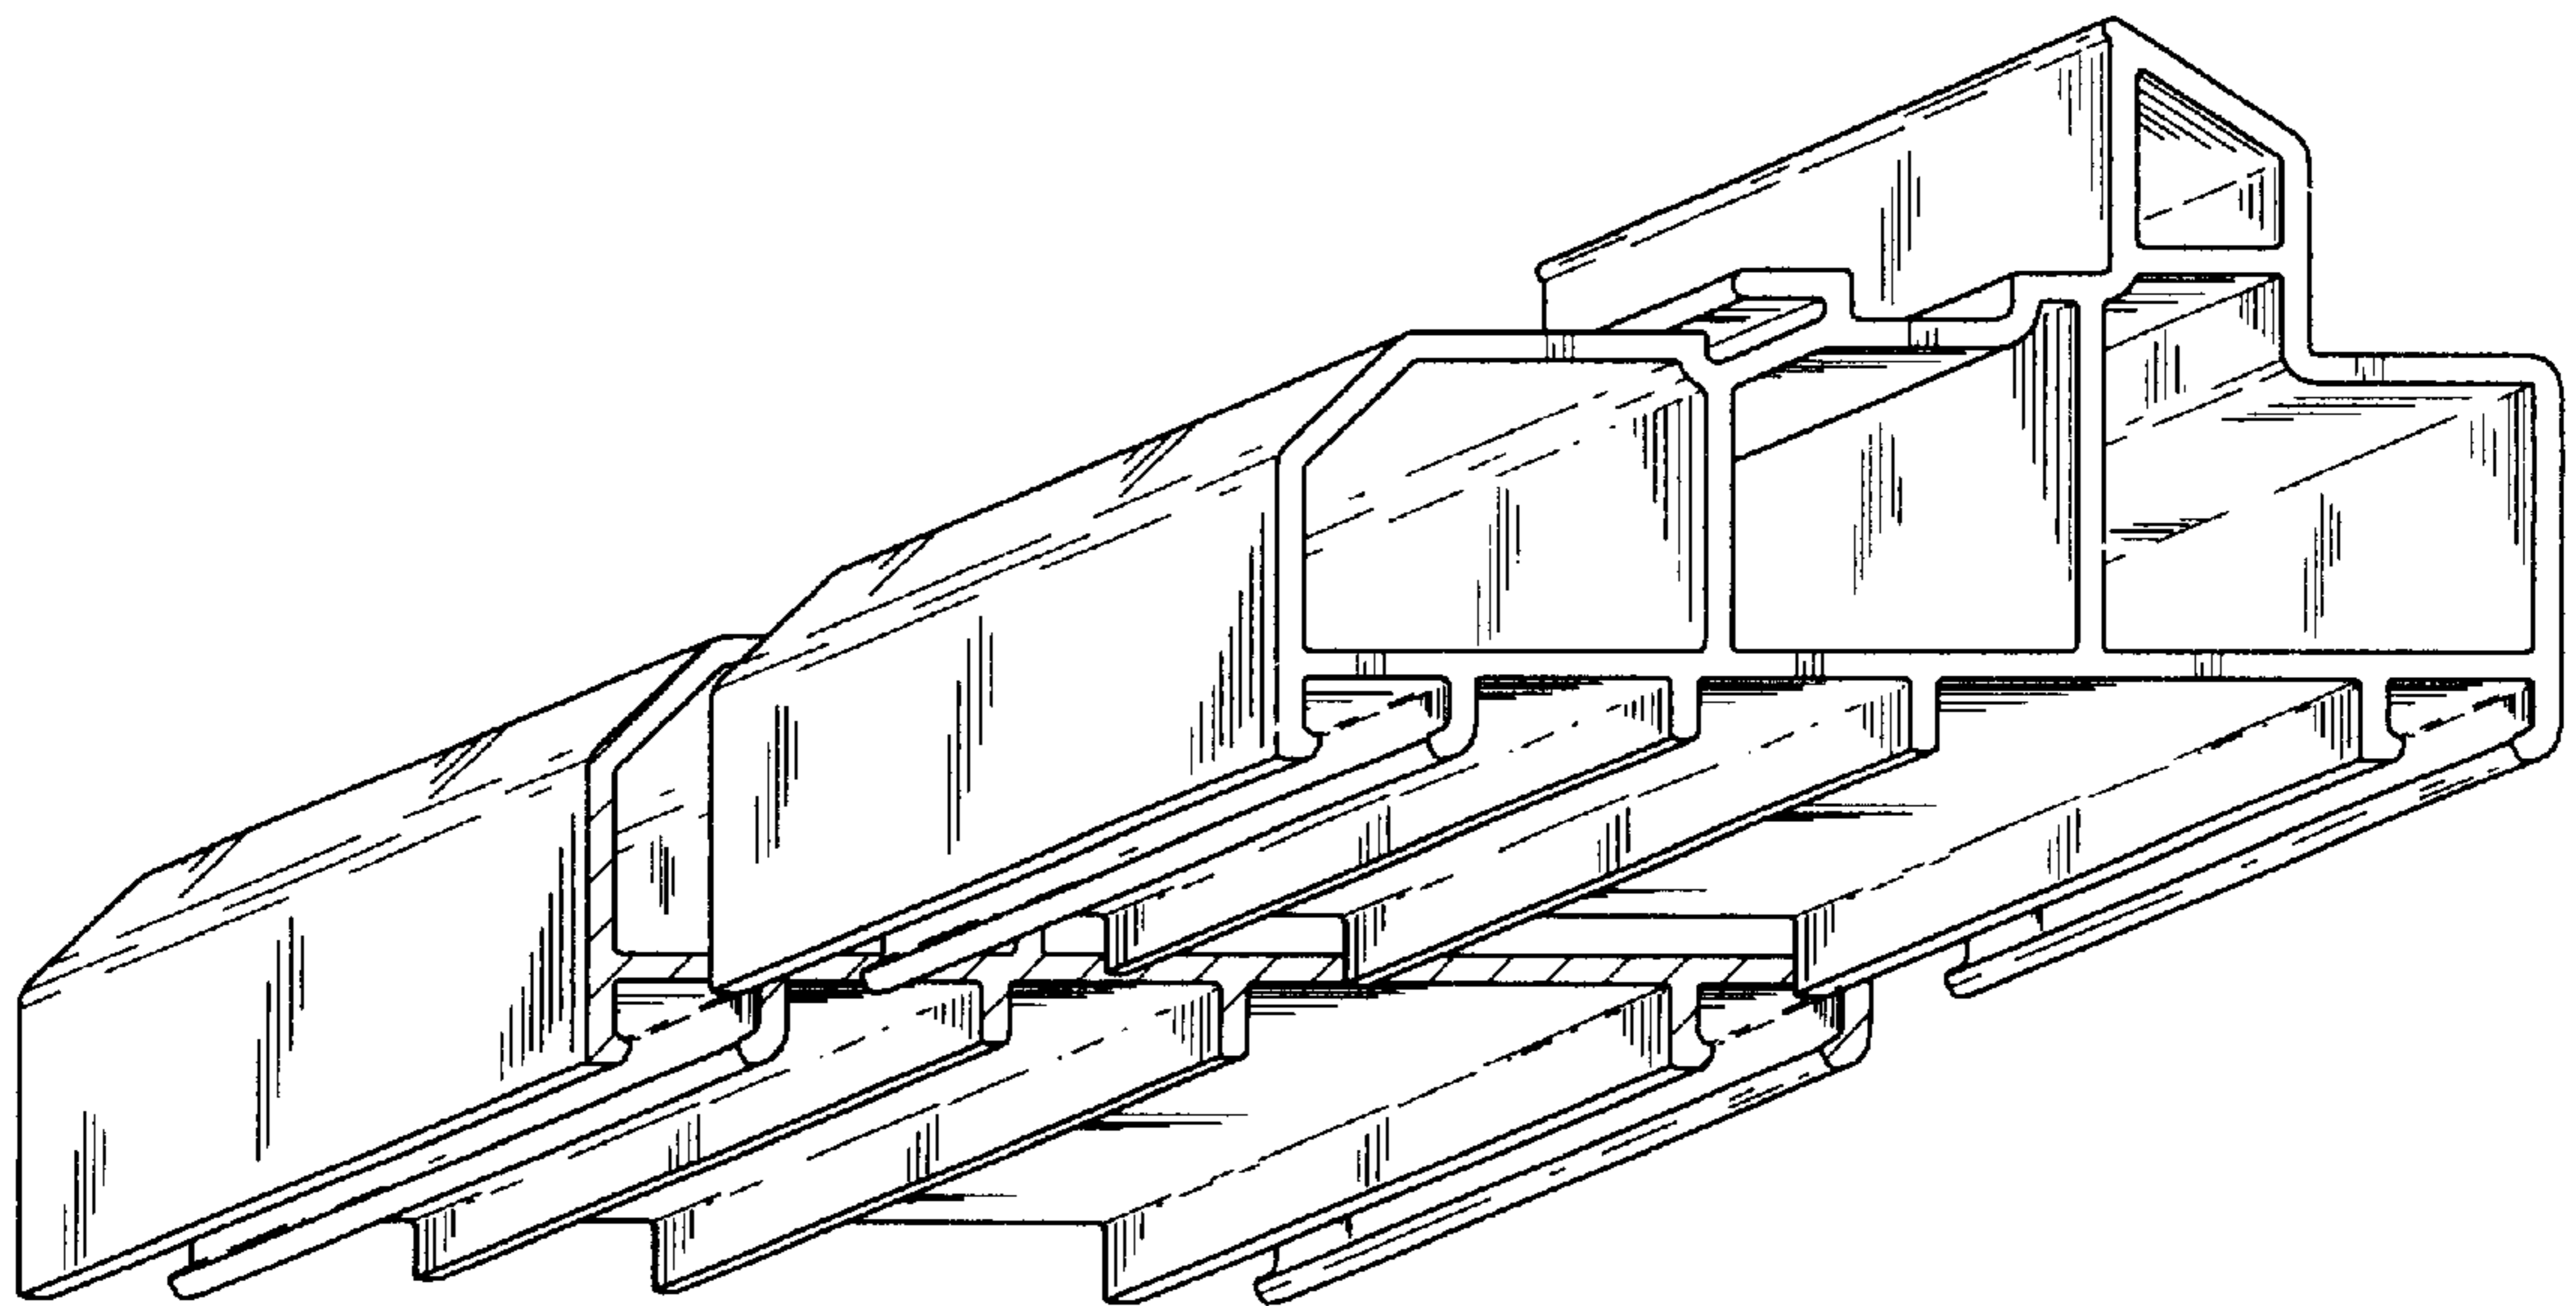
is a bottom left perspective view of the window component extrusion shown in FIG. 3.
